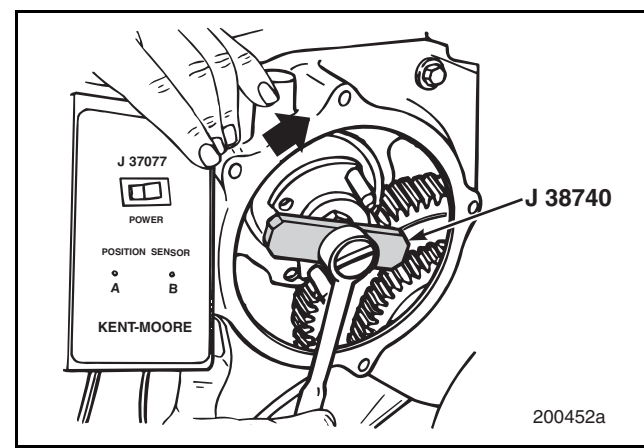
Rotating Timing Gear Hub Clockwise
